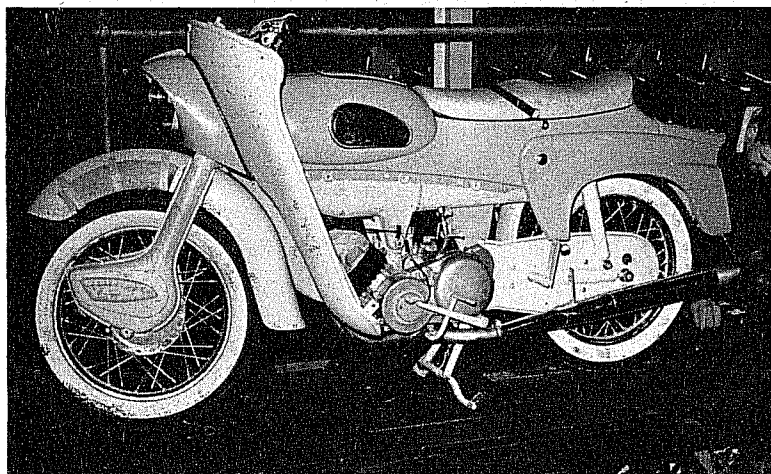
(below).—A "Leader" nearing the end of the assembly line
